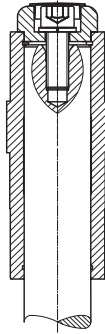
Gear unit mounted to shaft without a shoulder using the fastening element
